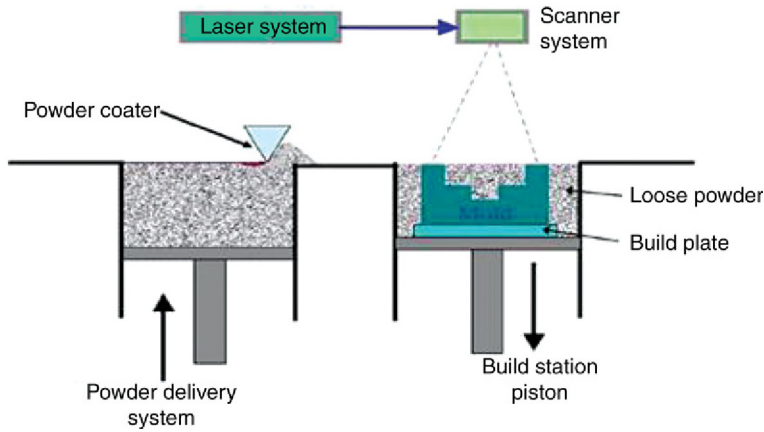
Schematic showing powder bed fusion technology. (Courtesy Jim Sears.)
